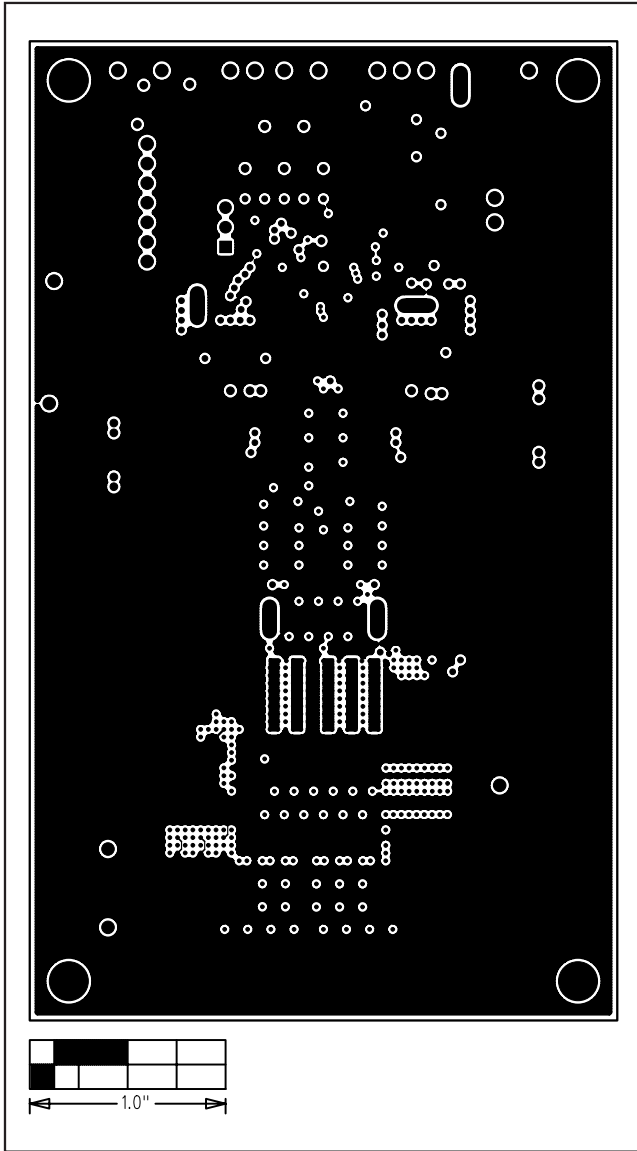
MAX17082 EV Kit PCB Layout—Internal Layer 4 (PGND Layer)
